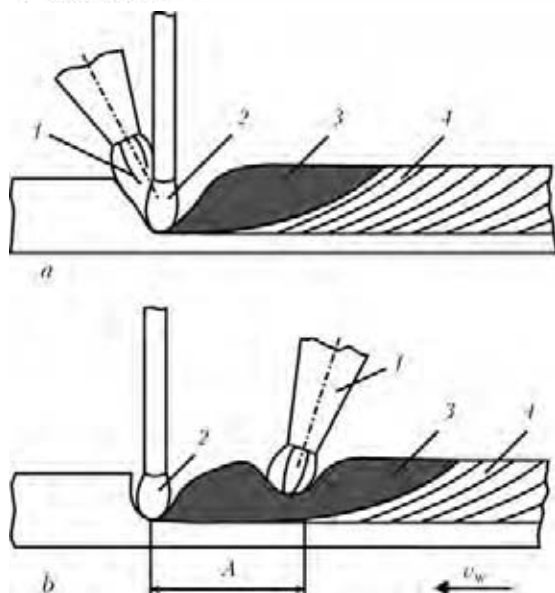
Schematic of hybrid arc + gas flame welding: *a* – gas flame is ahead of the arc; *b* – behind the arc; 1 – gas flame; 2 – electric arc; 3 – weld pool; 4 – weld
